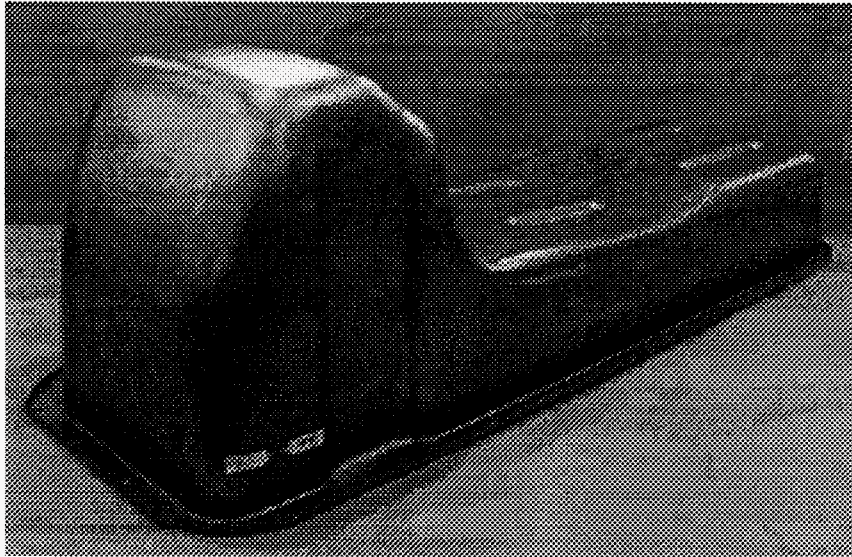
General view of oil pan in steel S6b showing general location of fatigue specimens.
